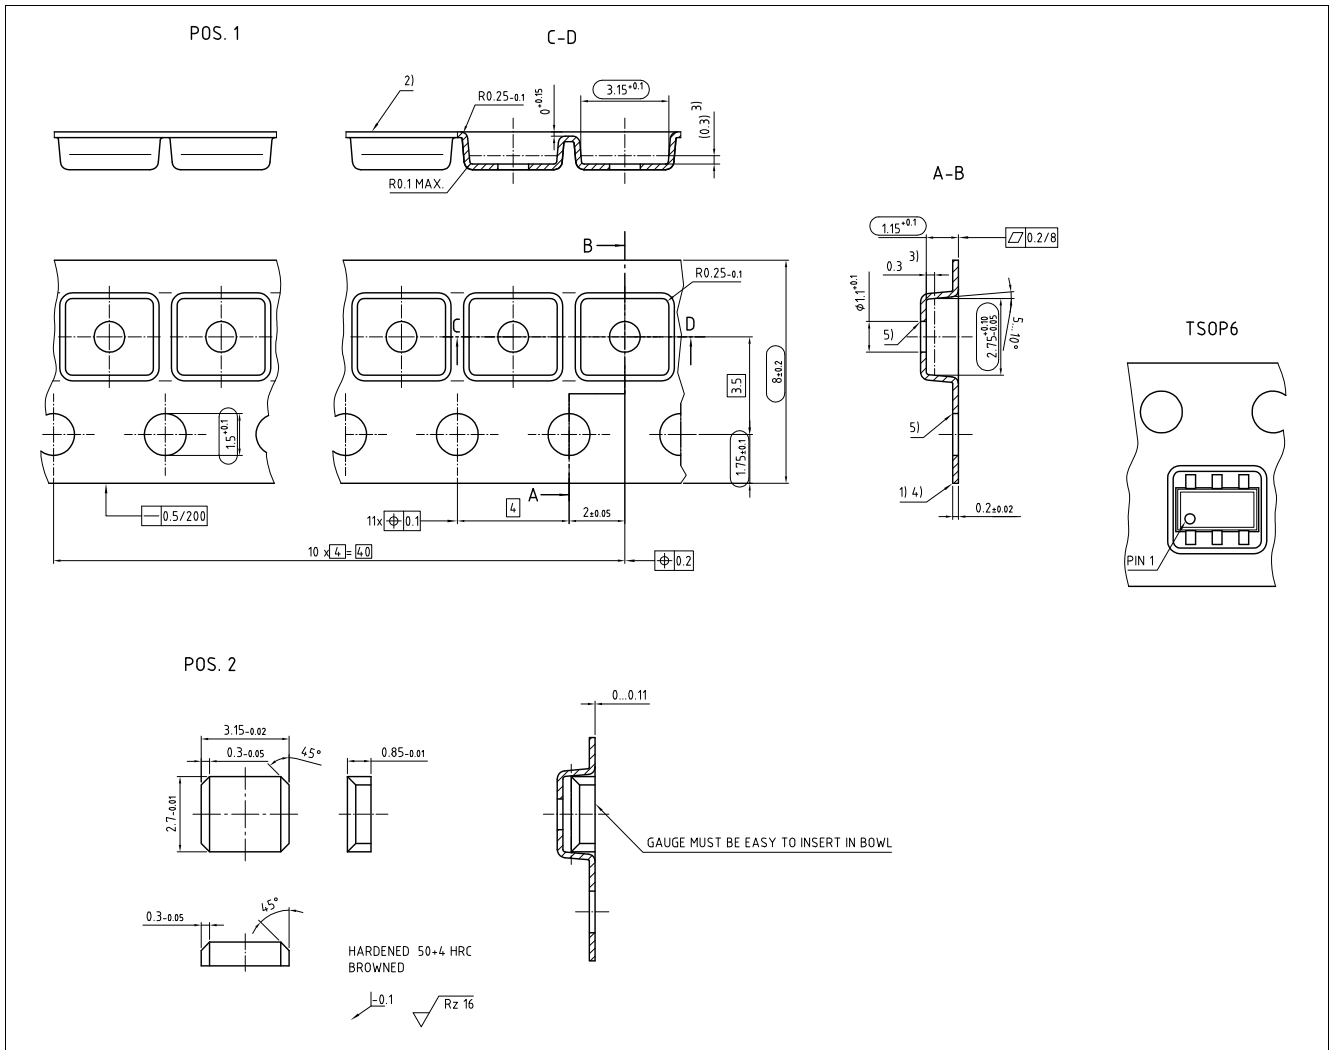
PG-TSOP6-6-5 Packing (All dimensions in mm)
